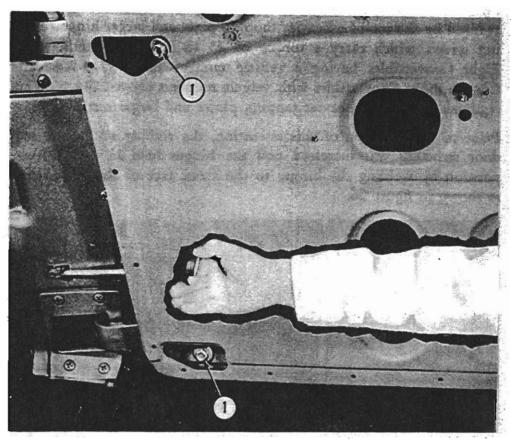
Reach through the Lower Access Opening in the Door Inner Panel and Remove the Door Check Arm Pin.
